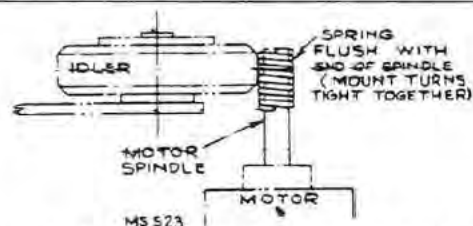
Spring Sleeve Installed on 60-Cycle Motor Spindle for Operation on 50-Cycle Supply.
